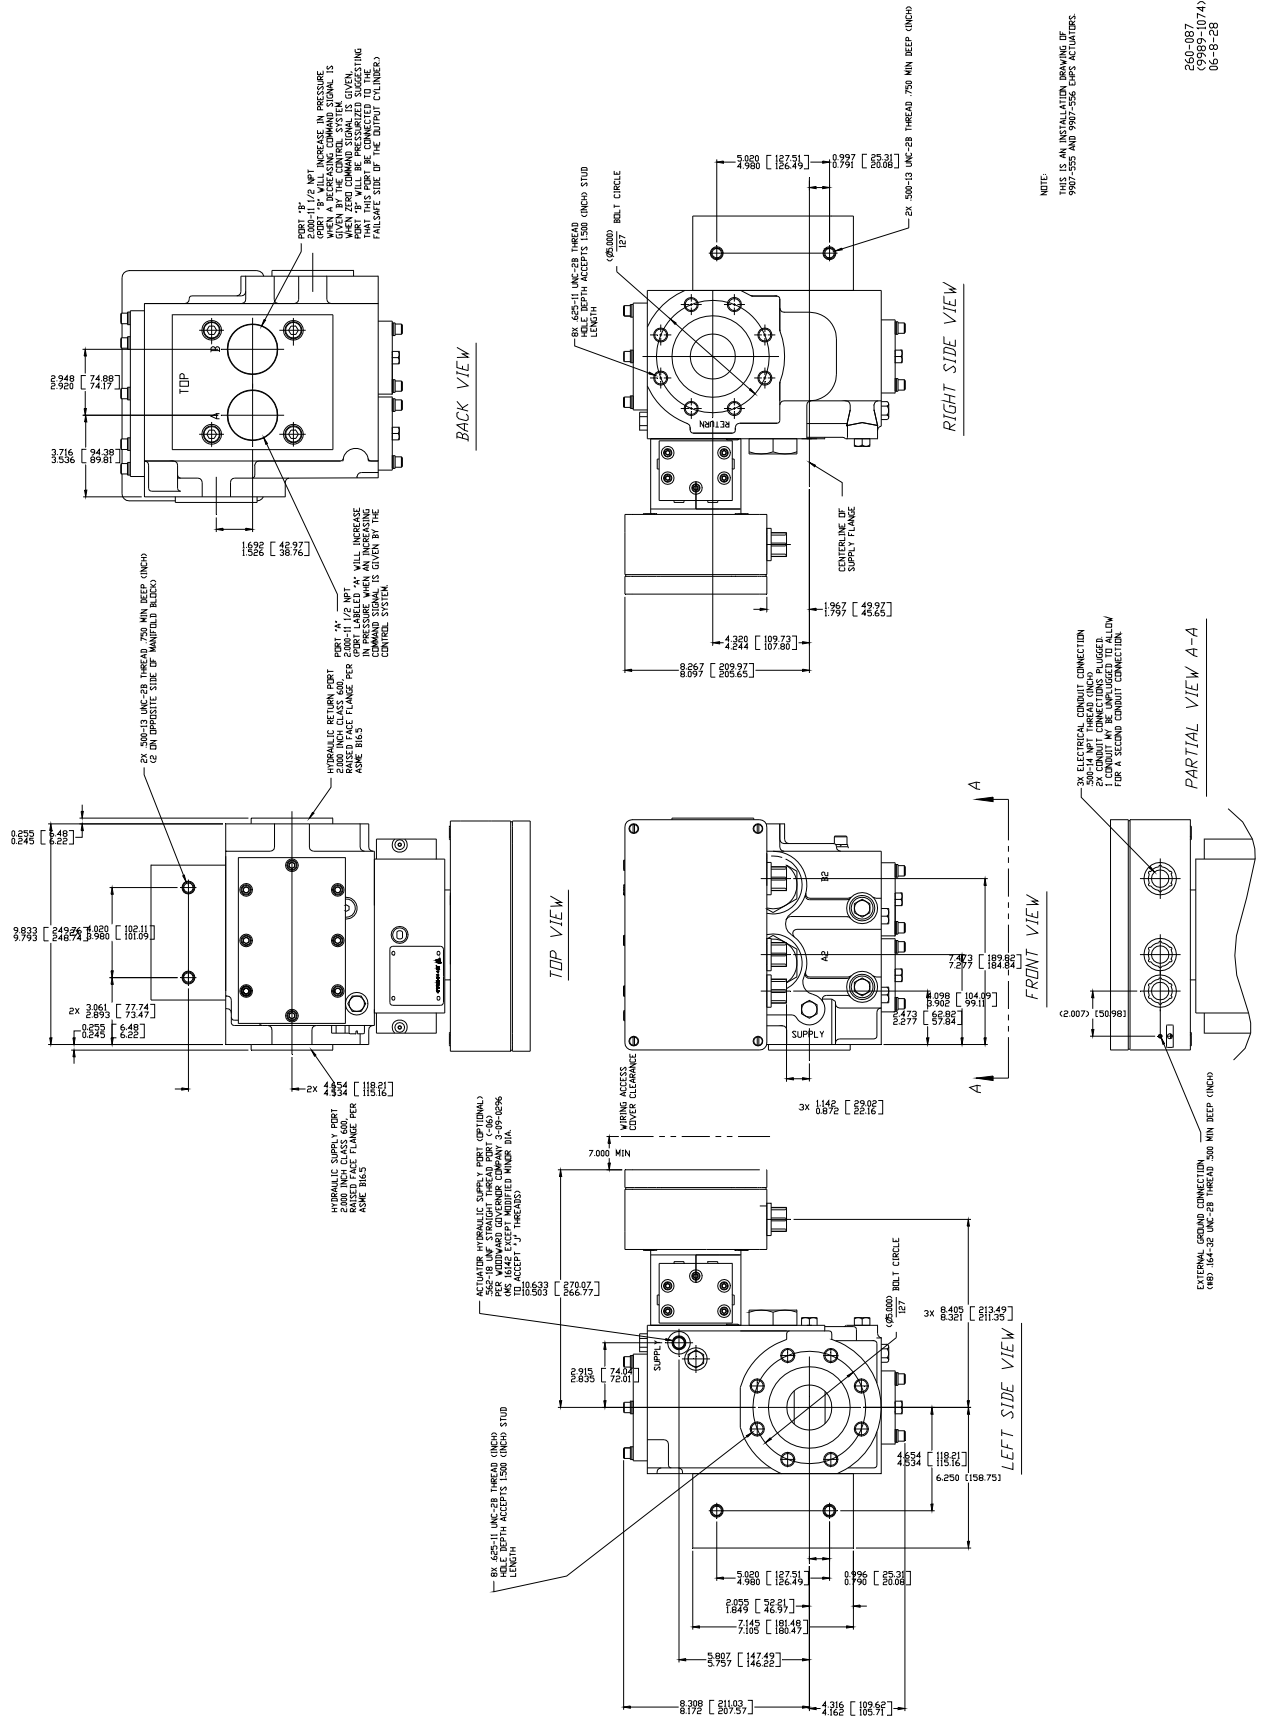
Outline Drawing of Electrohydraulic Power Servo (Dual Coil)
